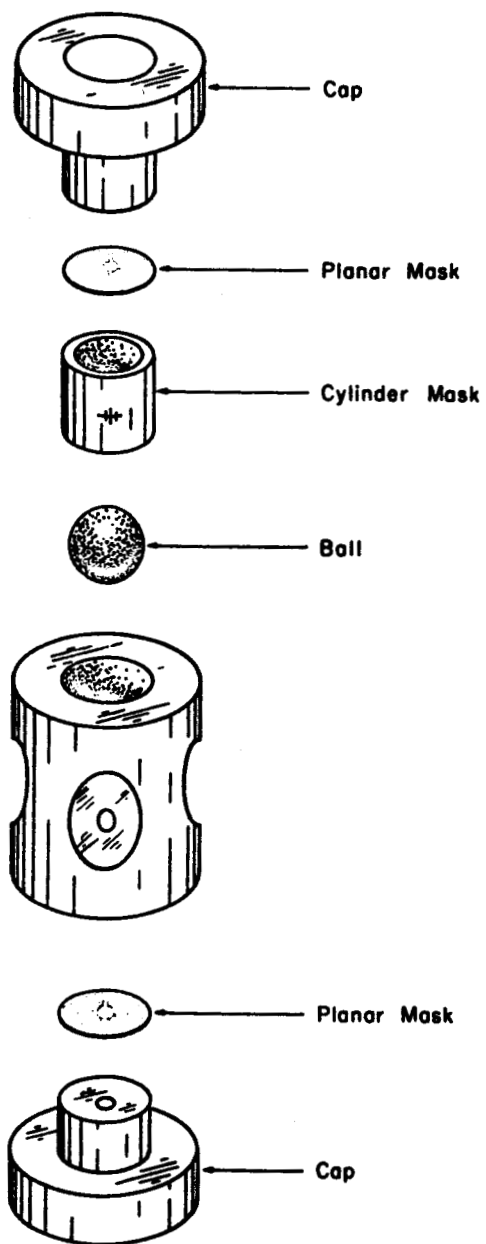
Exploded view of ball exposure cage with masks. Drawing No. RA-2265
